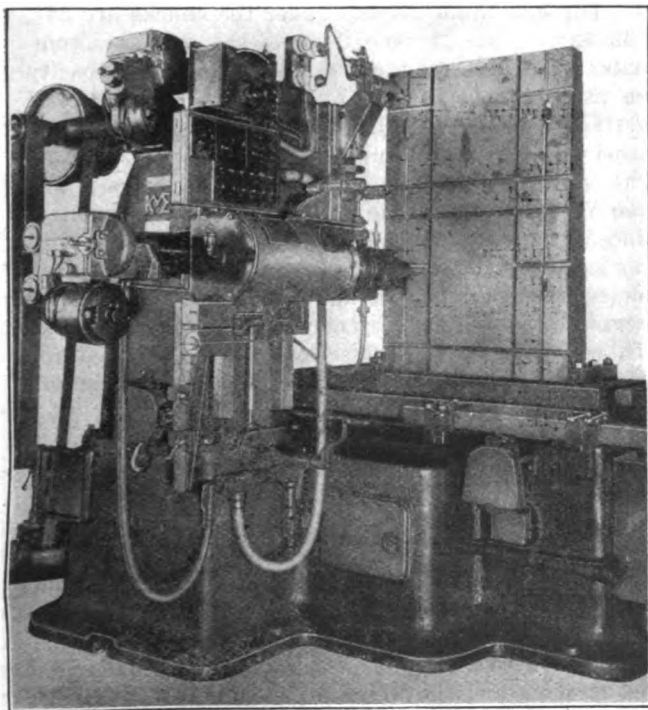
KELLER TYPE F DIE-SINKING MACHINE
